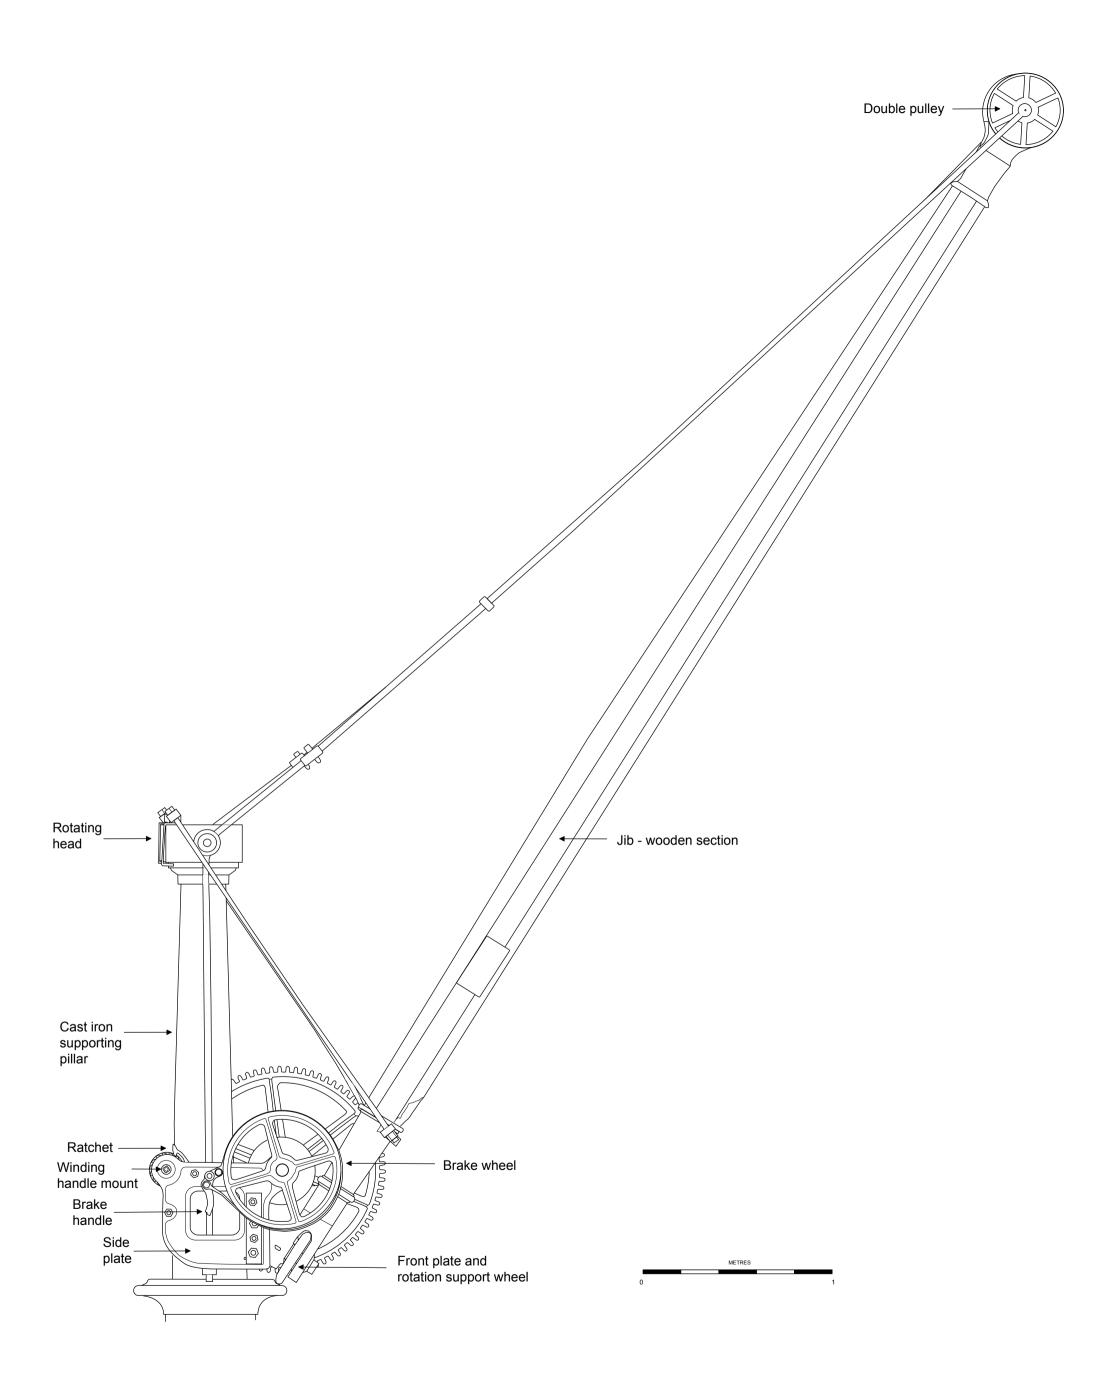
Site 3(13) Crane (Llechwedd exchange sidings) right elevation
